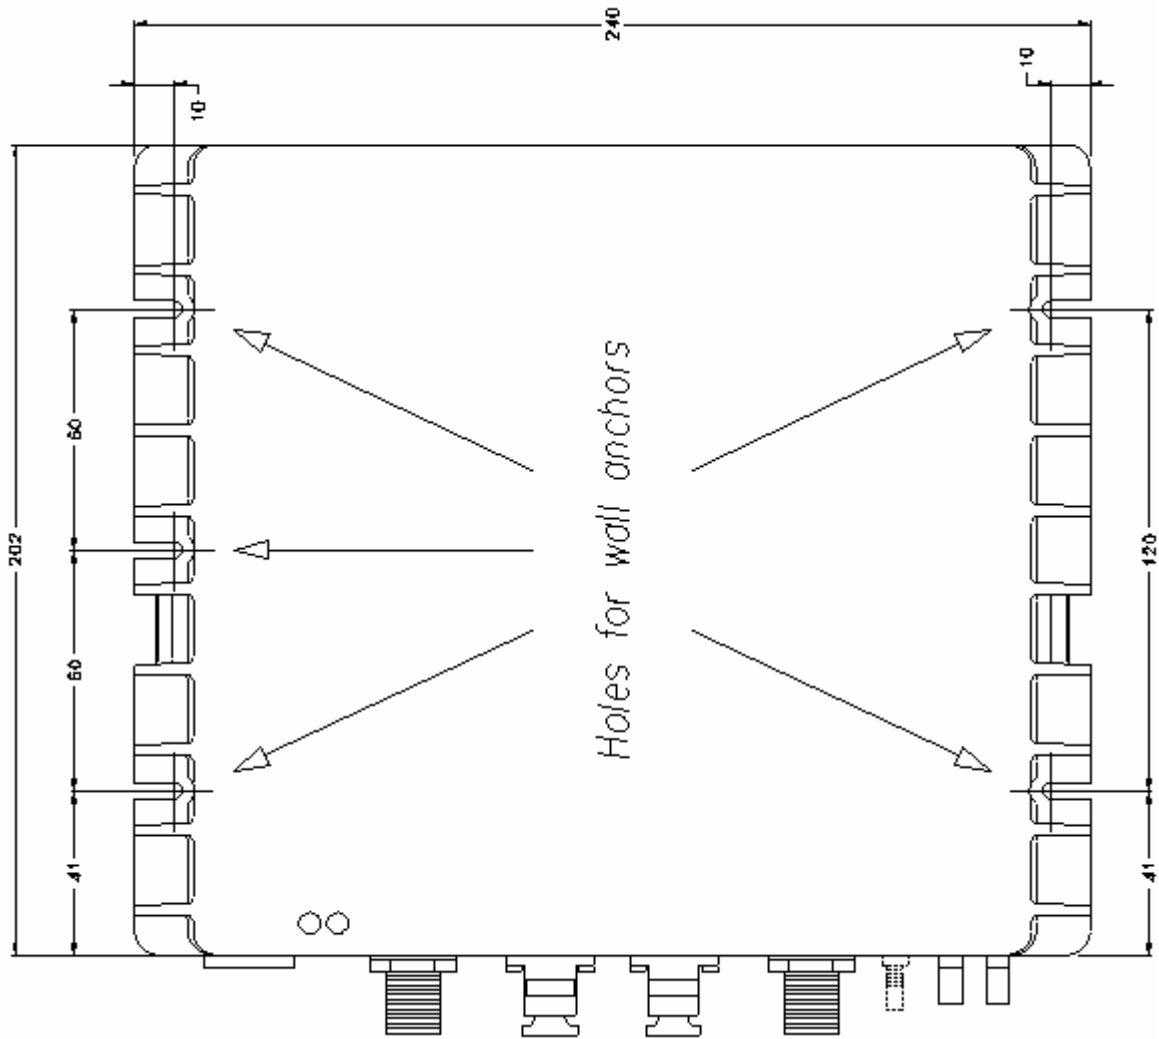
(a): Layout of the TFBW booster, with wall anchor quotes
